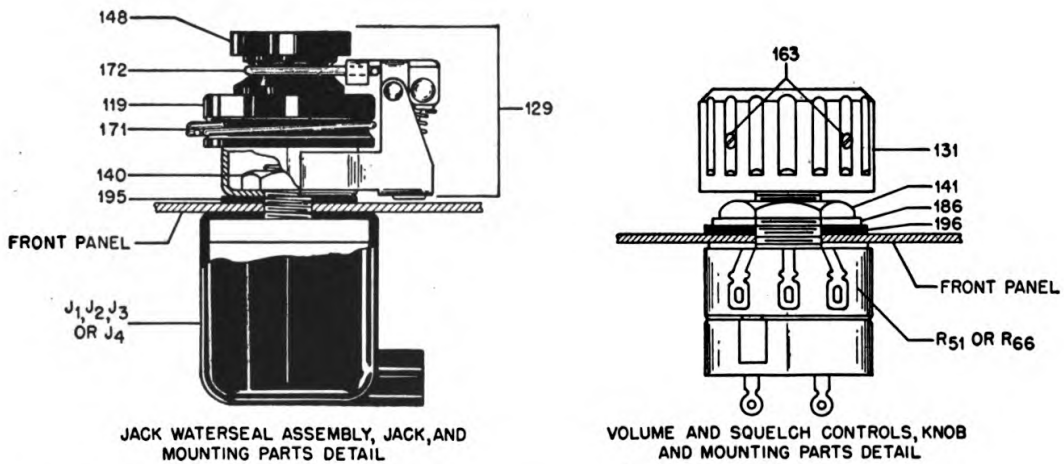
Radio Receiver and Transmitter BC-1000-A, Parts Location Detail, Showing Jack Waterseal Assembly, Volume and Squelch Controls.
